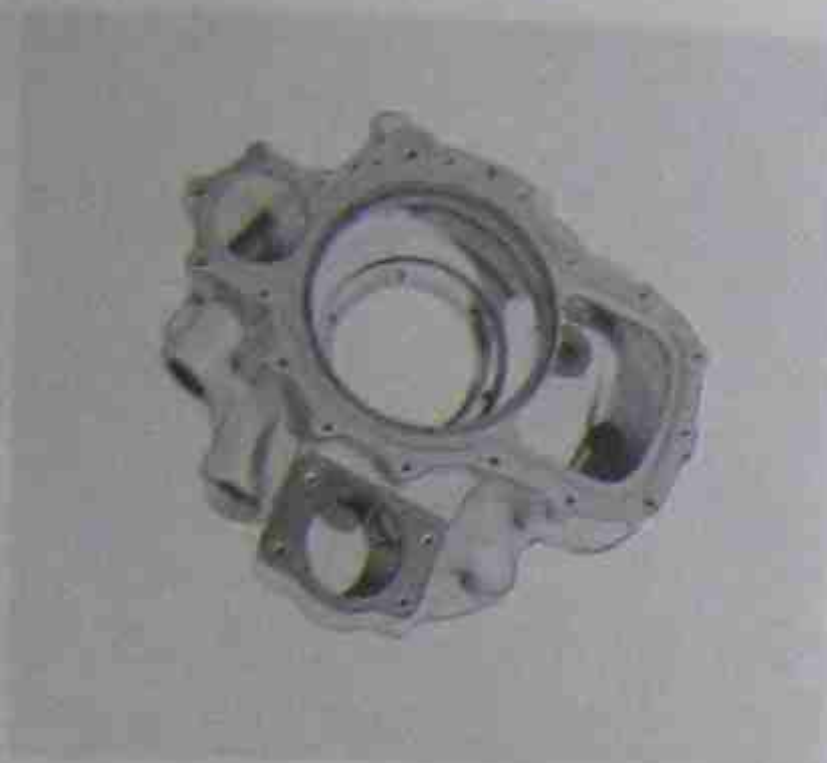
Using two heads operating simultaneously, this large numerically controlled milling machine reduced the machining time of the parts shown by 93 percent.
